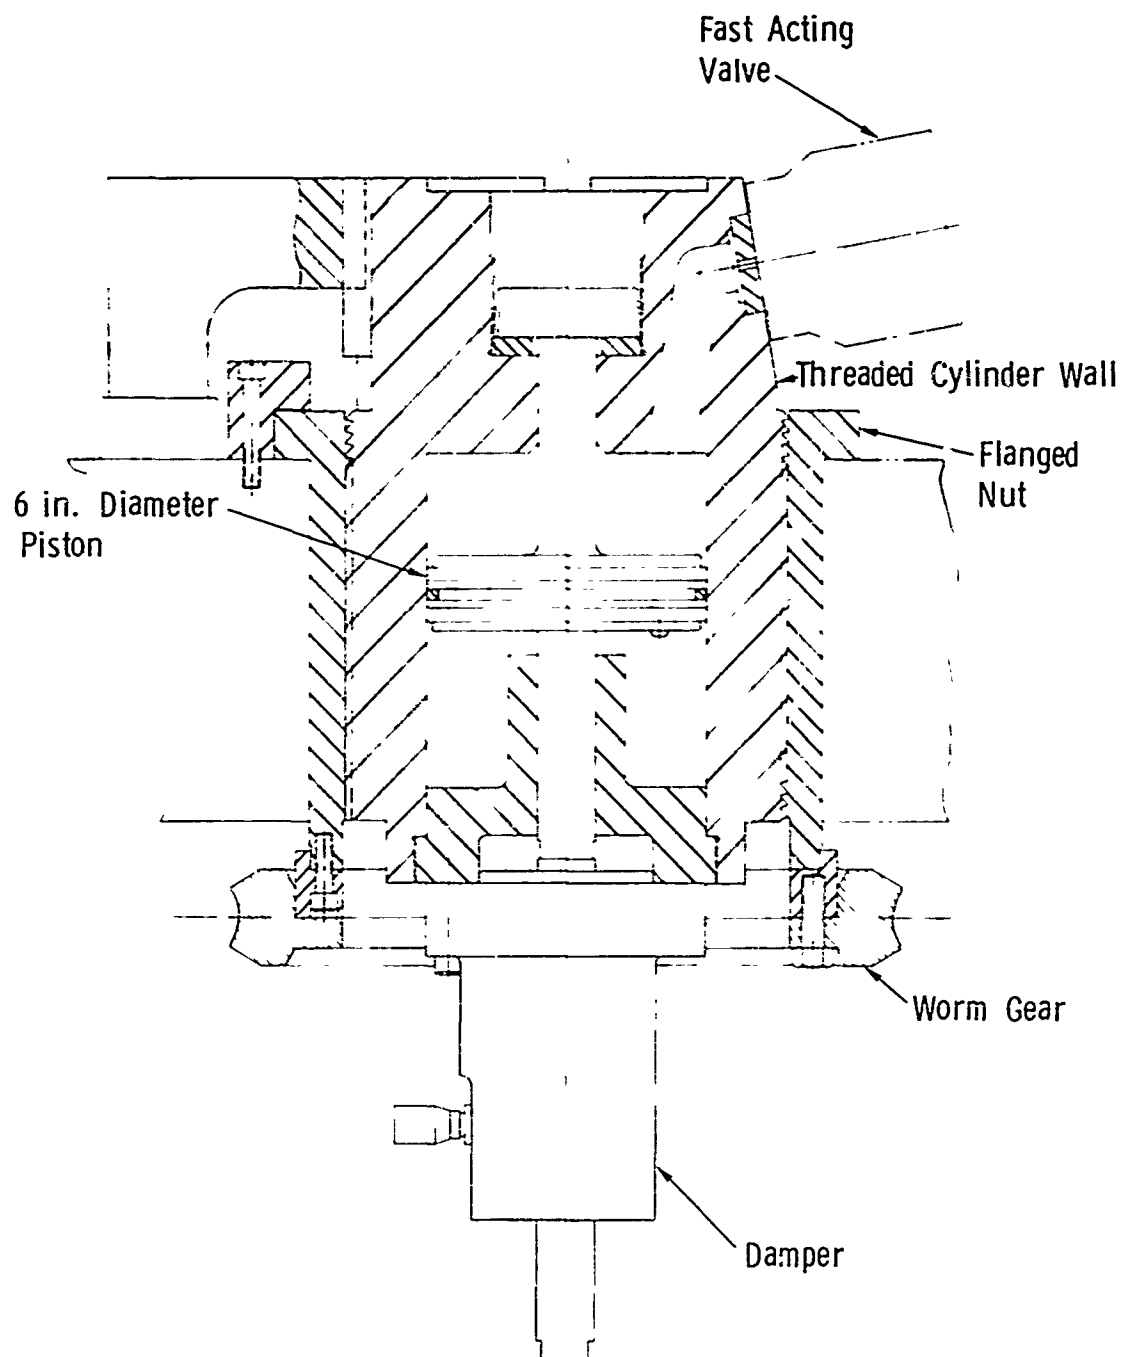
Sectional View of 6 inch Diameter, Circumferential Loading Cylinder
